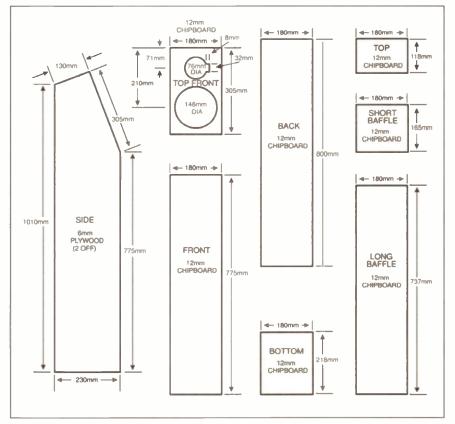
Cutting details and dimensions for a single enclosure (two for stereo).
